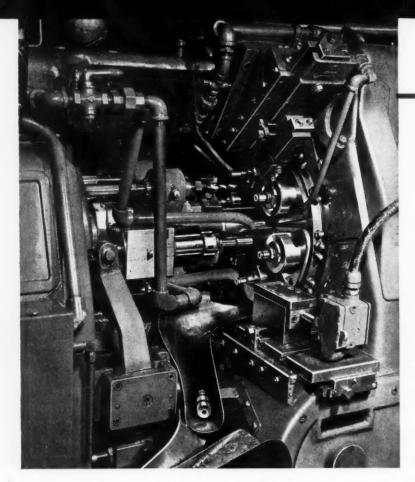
Rear View of a Six-spindle Automatic Employed to Drill, Ream, Form, Groove, and Face Valve Guide Bushings at a Rate of 870 per Hour
